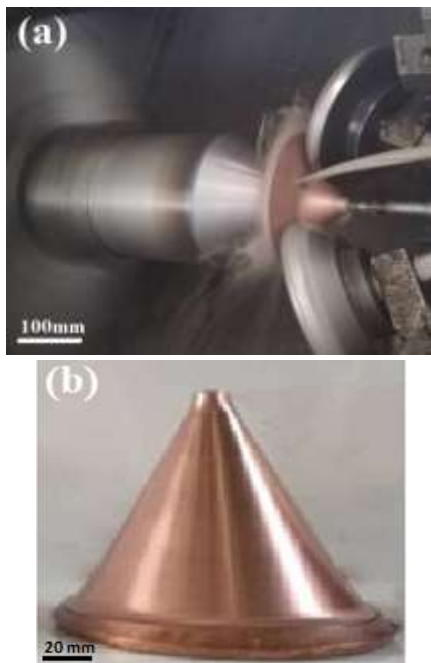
(a) The shear spinning machine used and (b) the specimen was formed by shear spinning.
